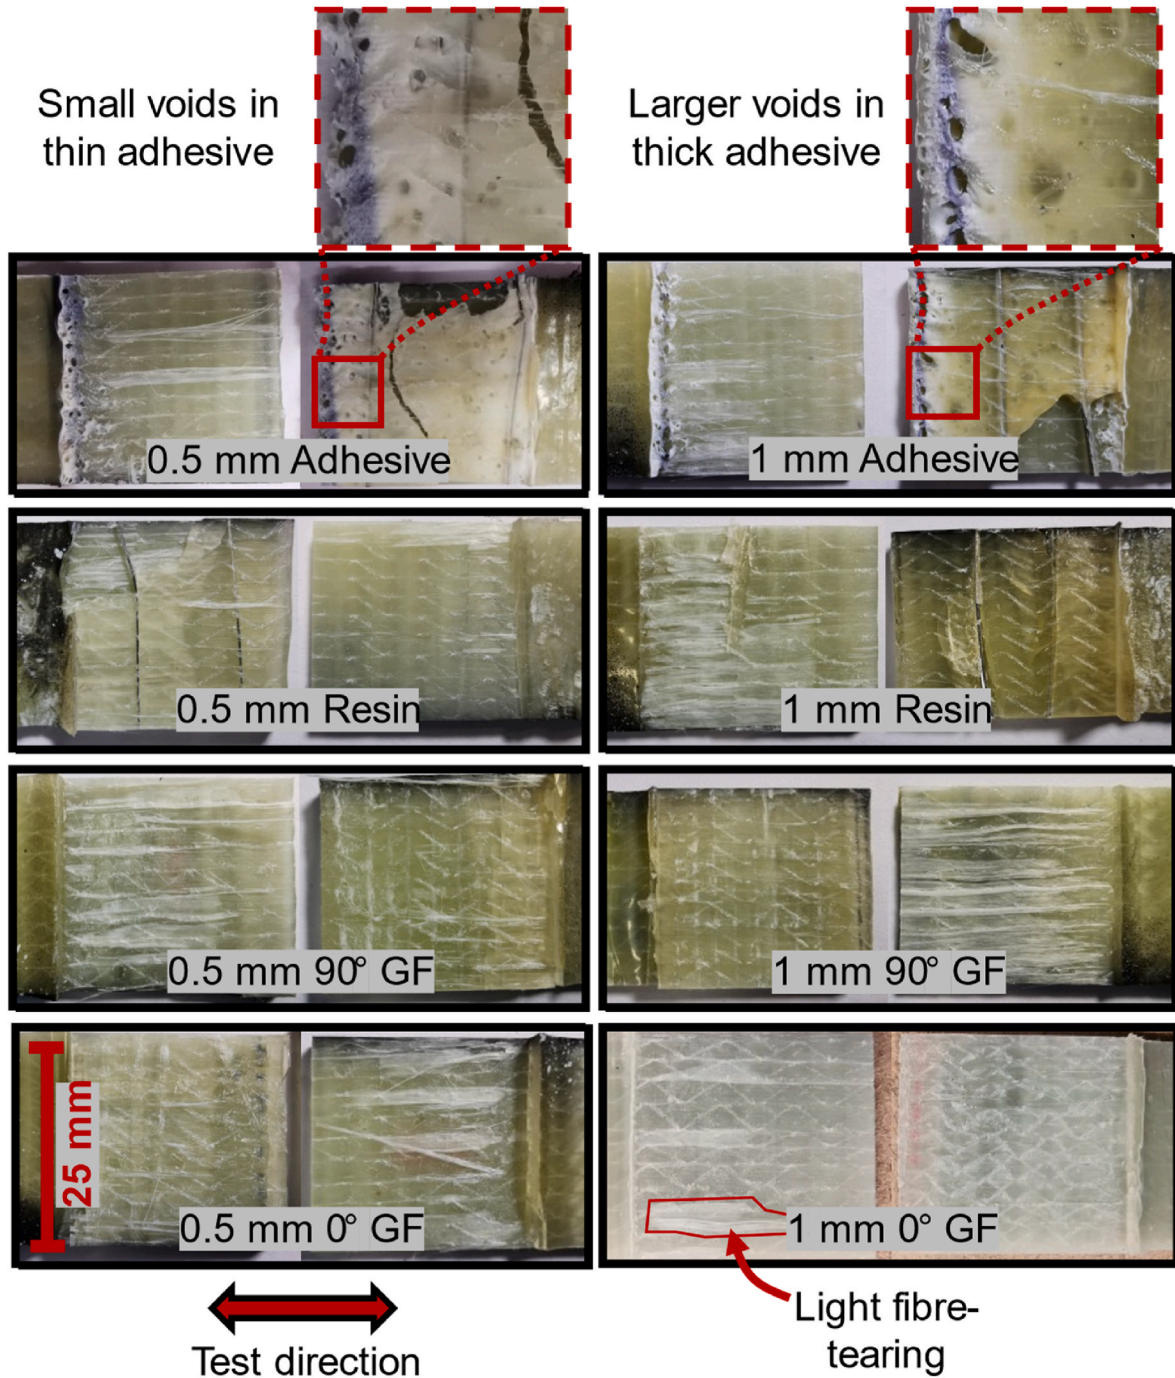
Representative fracture surfaces of the tested single lap coupons. Each image is of both halves of a fractured coupon. The crack propagation direction (the testing direction) is shown. Light fibre tearing is highlighted in the 1 mm 0 GF coupon, but it is visible in all fracture surfaces. The voids present in both adhesive bonds are shown at higher magnification, and larger voids are visible in the 1 mm thick adhesive. Voids were not visible in the resin welded coupons.
